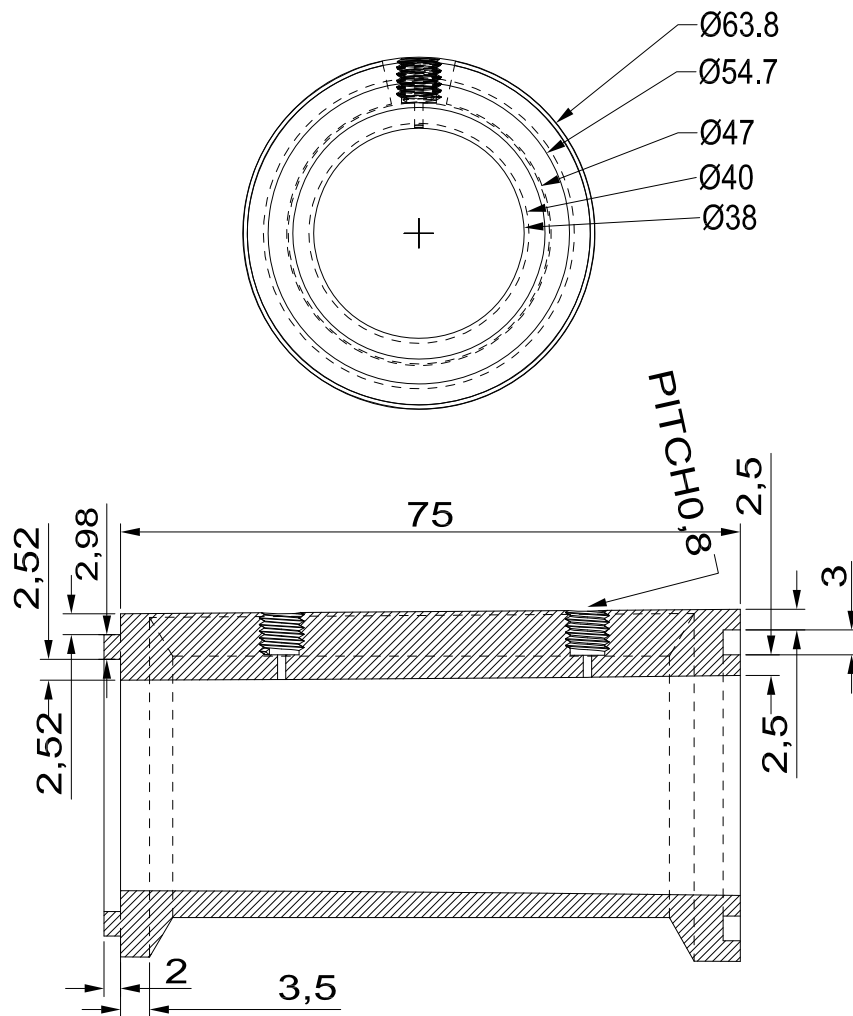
Profile of the part 3 of CRMC ejector with main dimensions, all dimensions in mm.
